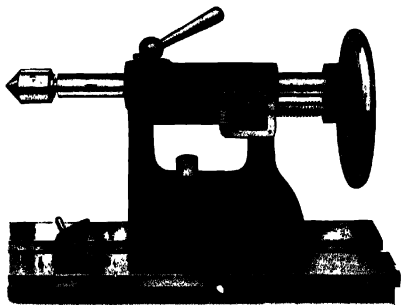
Spinning-lathe tailstock with sliding, quick-release spindle.
